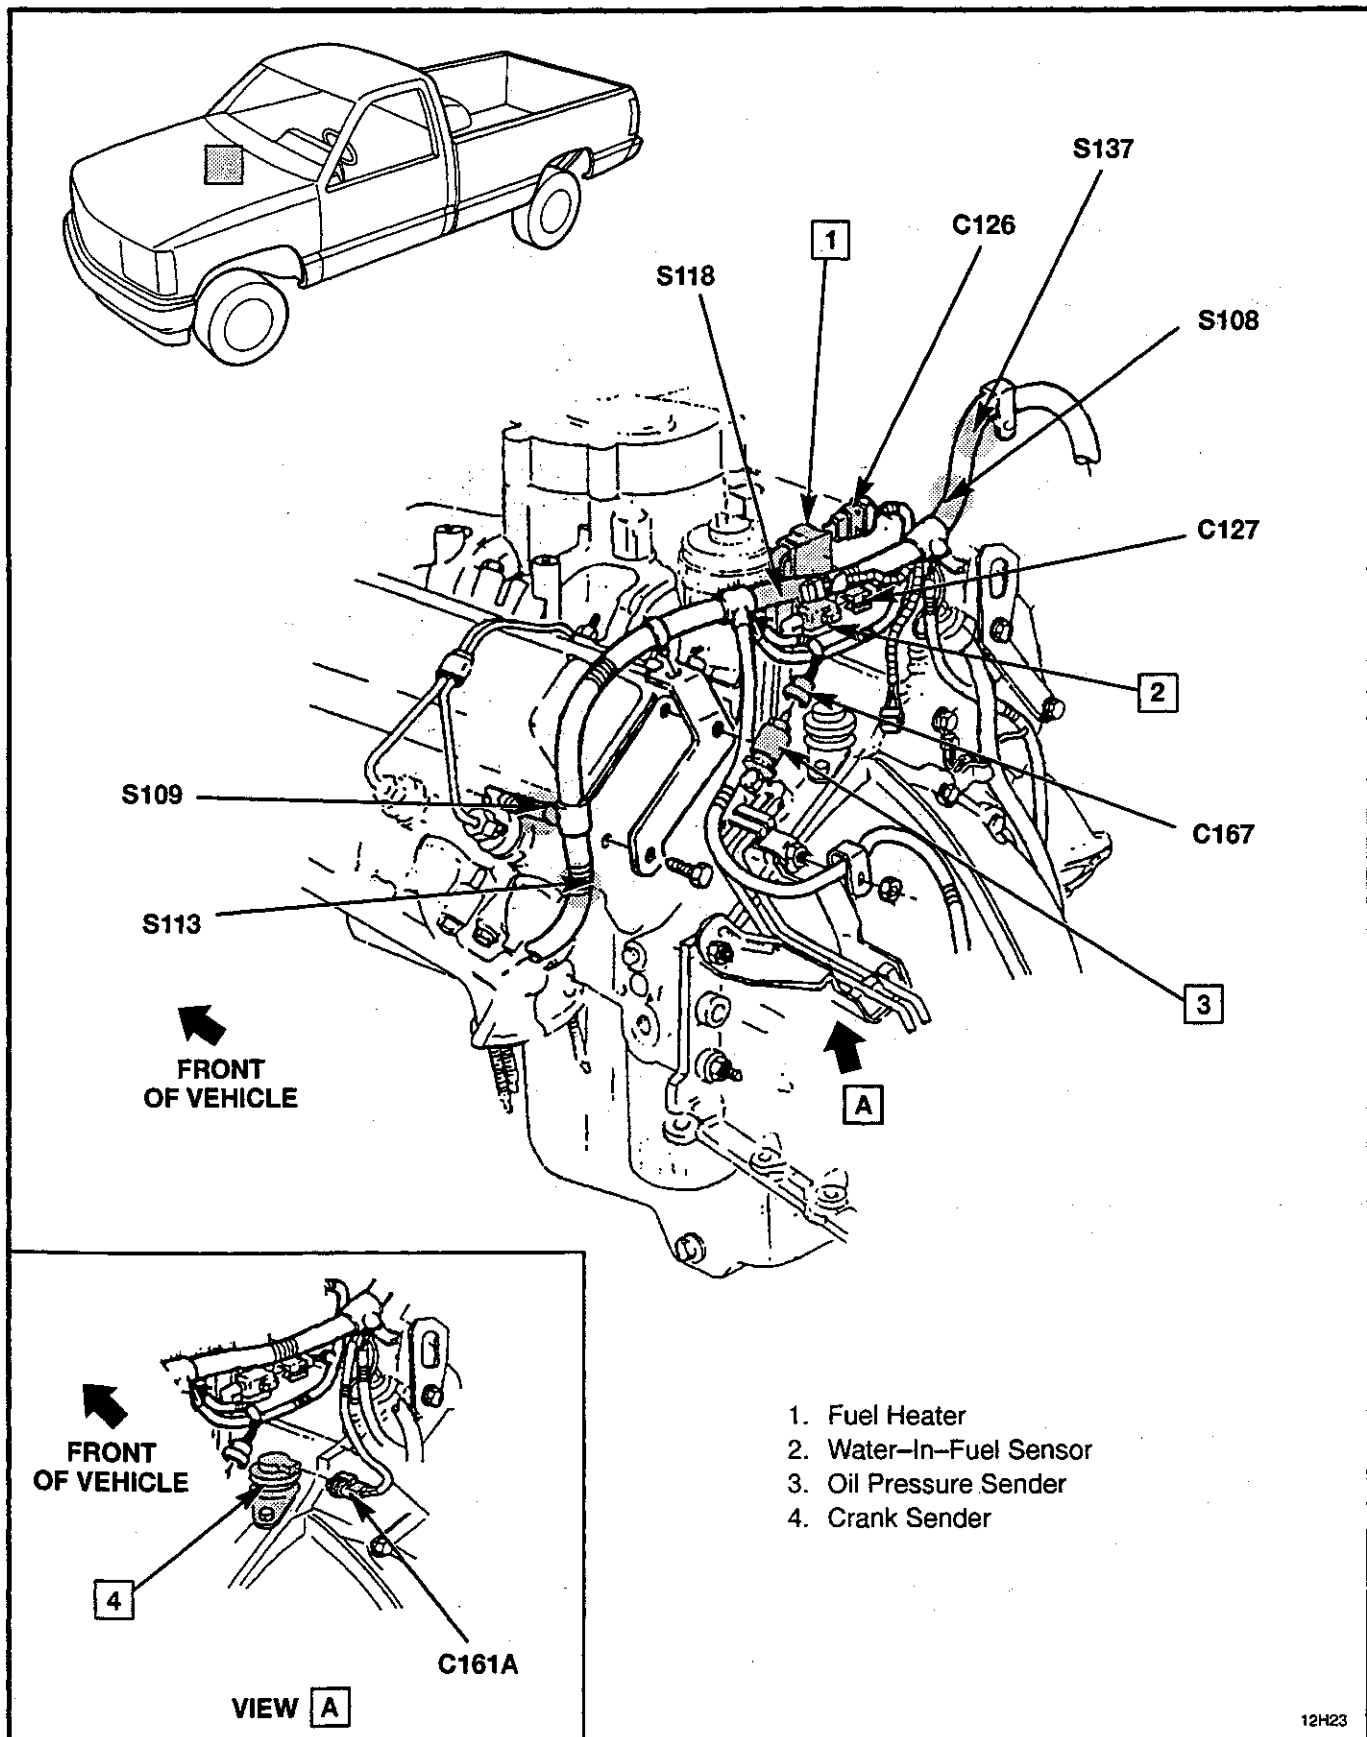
6.5L Diesel Engine Wiring, Rear
